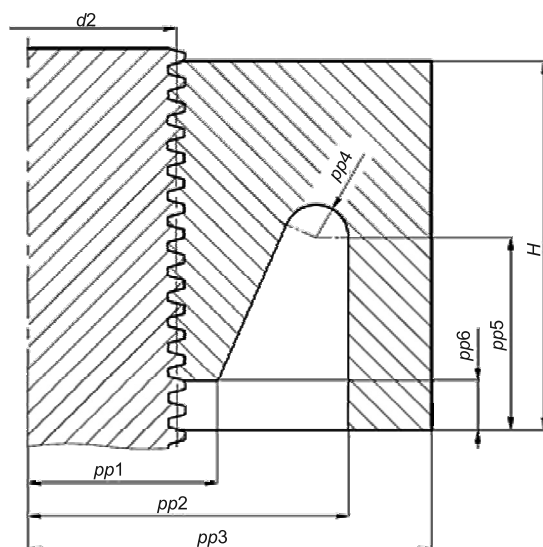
Design variables and dimensions of the nut with a groove in the end-face
